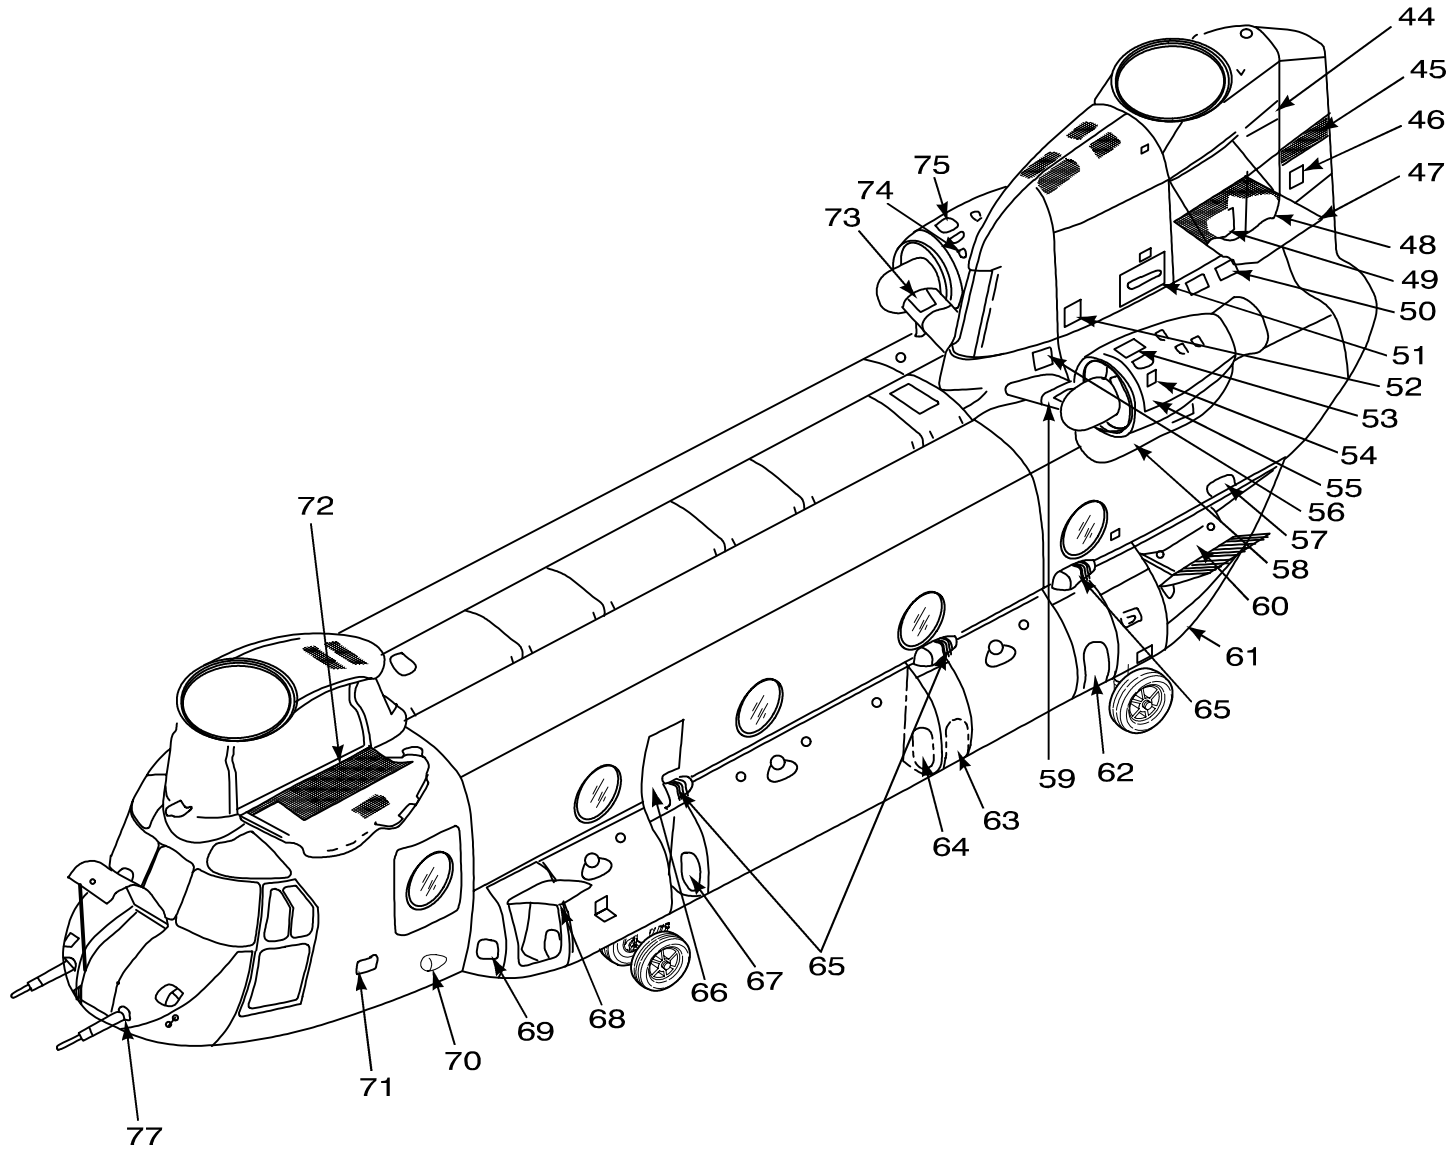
Access Doors, Covers, and Panels (Sheet 2 of 3)
